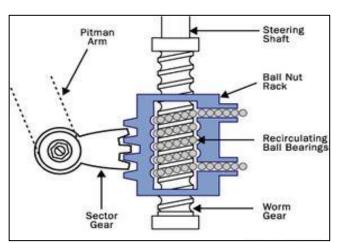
Recirculation Ball Type Steering Gear Mechanism
